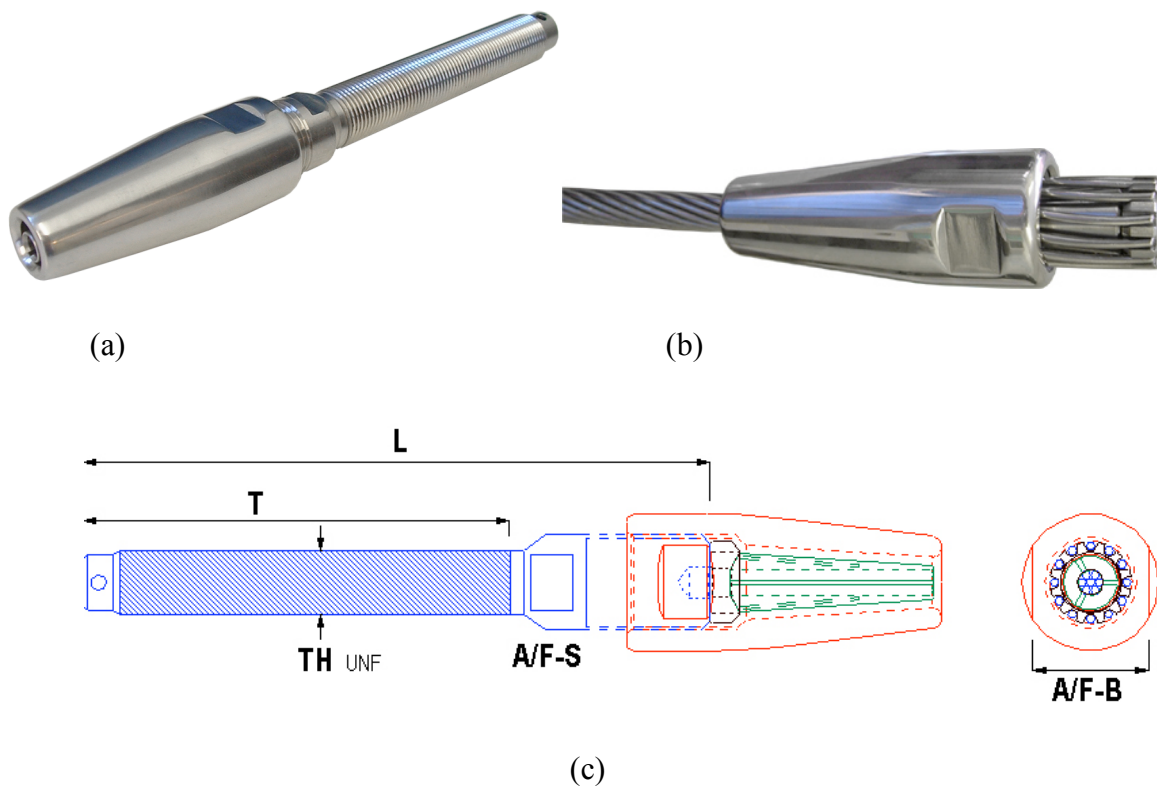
Hi-MOD Compression Fitting. (a) Compression stud fitting for steel cable. (b) Detail of an assembled compression fitting (note the even spacing of the outer strands facilitated by the special star shaped crown ring - a key feature of this particular make of compression fitting). (c) Line drawing section view of a compression fitting, the wedge shaped cone (shown in green) grips the wires as they are put in tension preventing the cable from pulling out.
